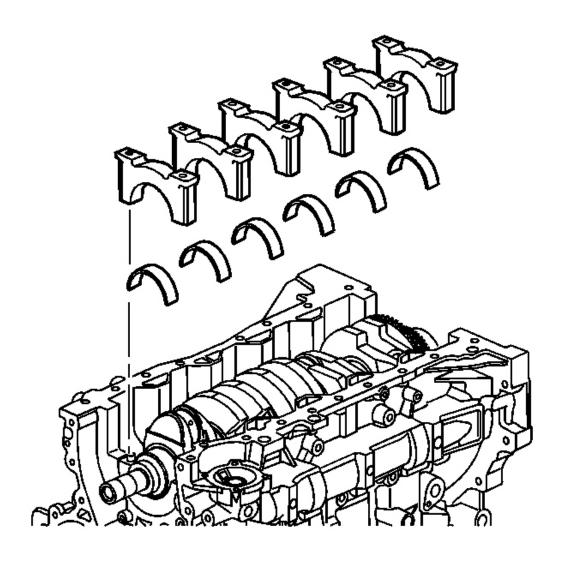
View Of Crankshaft Main Bearing Caps & Lower Bearings Courtesy of GENERAL MOTORS CORP.
